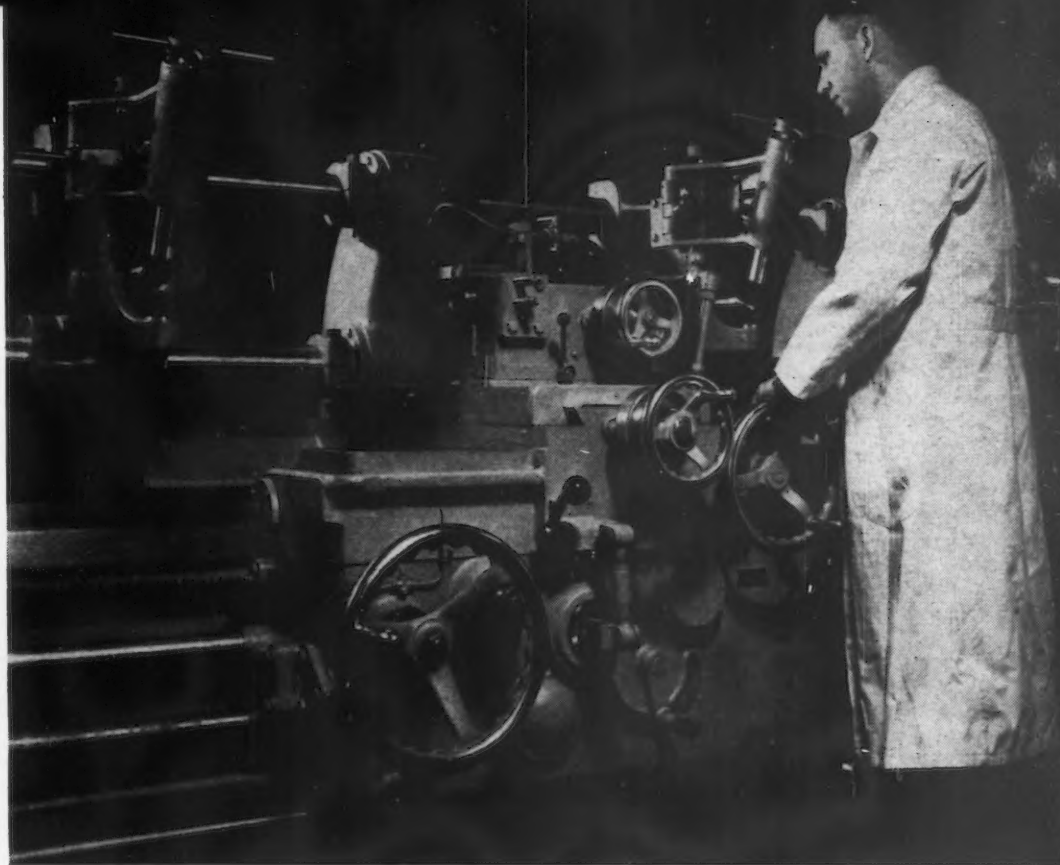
Close up of the working position on the Monarch leadscrew cutting machine. Workpiece has been removed to show the design of the special steady-rests.
